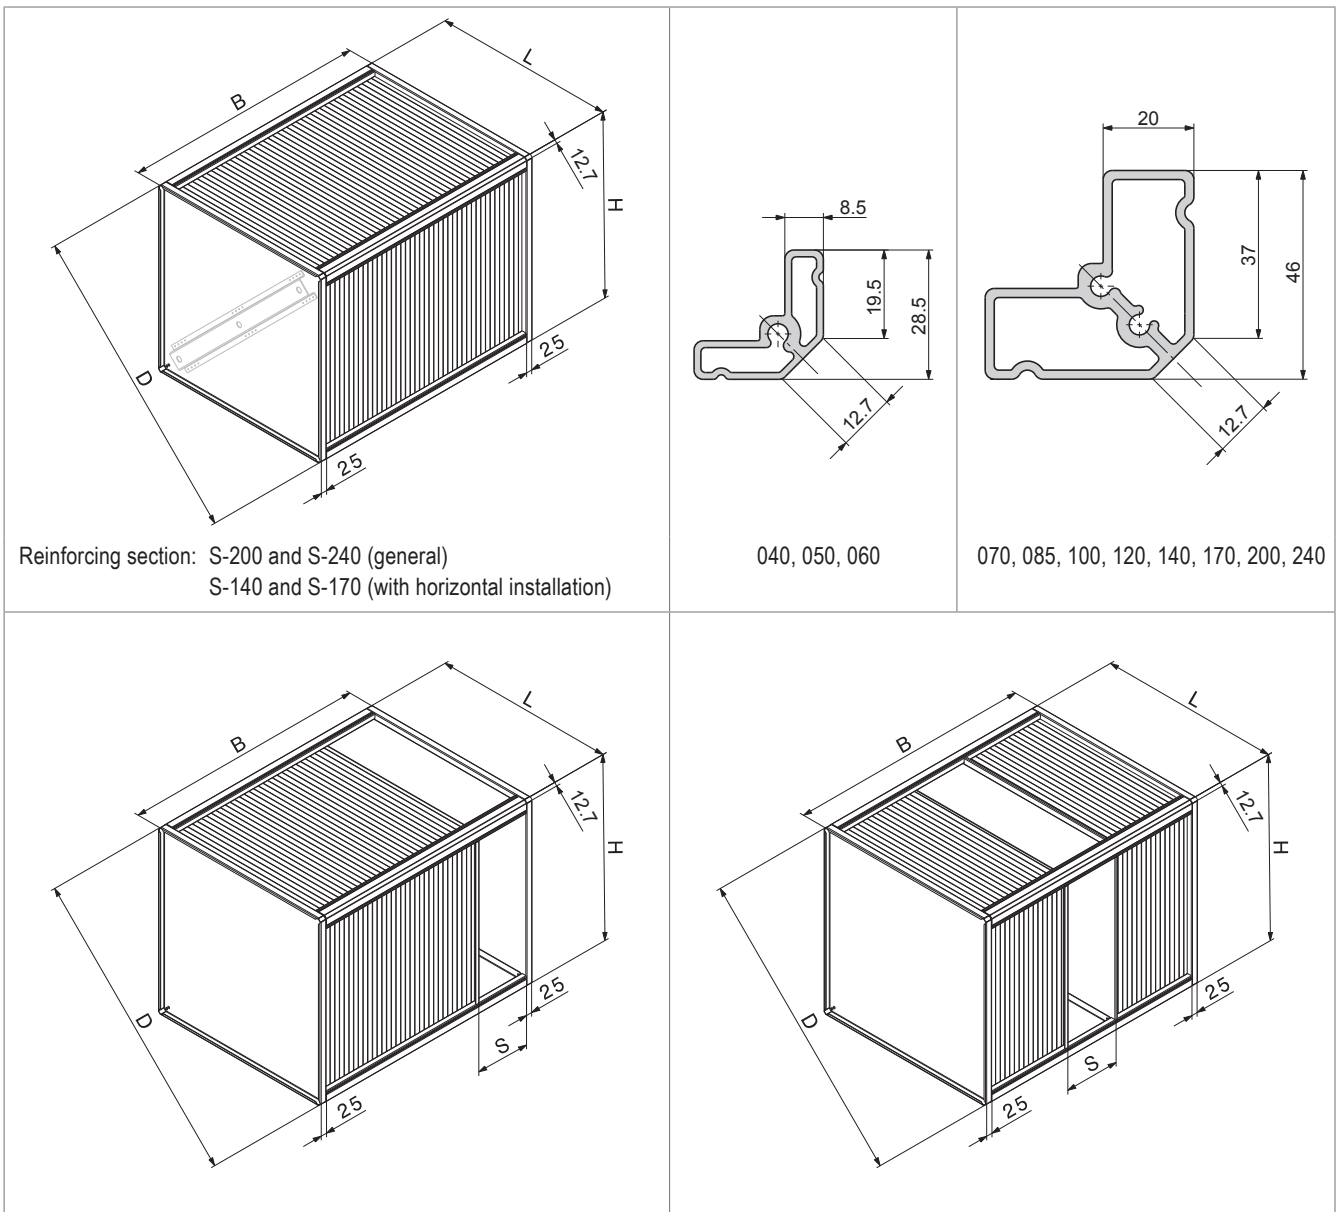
Dimension sheet for design S plate heat exchanger without dampers (dimensions in mm)
